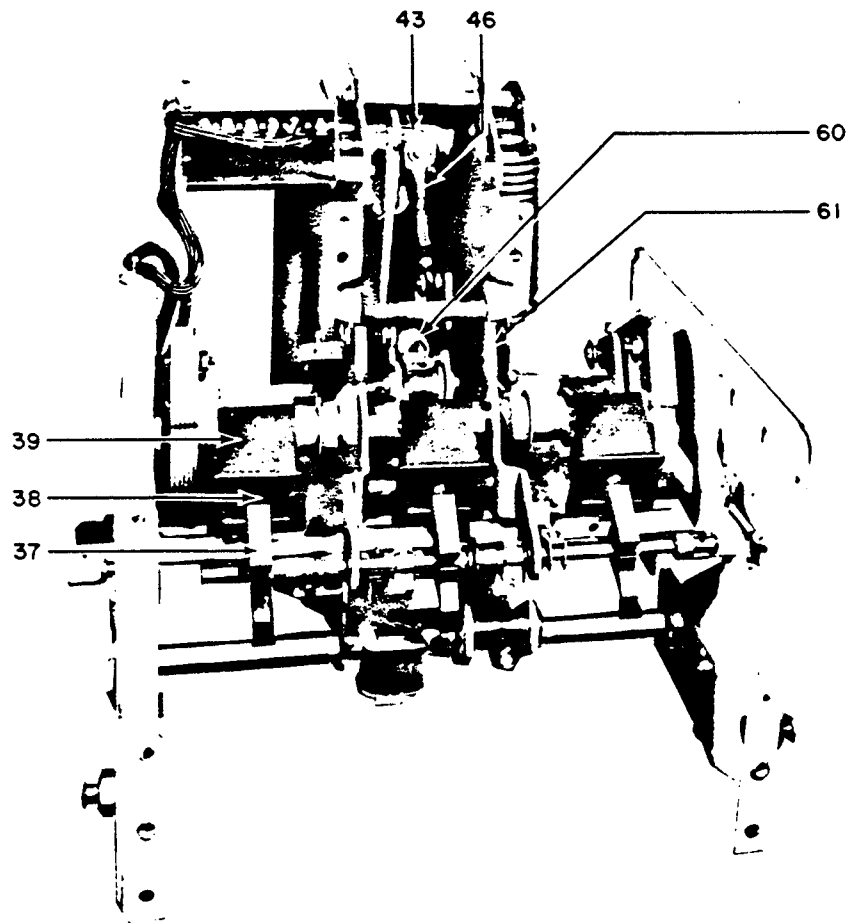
Front frame and mechanism assembly, Type AKR-50 breaker
